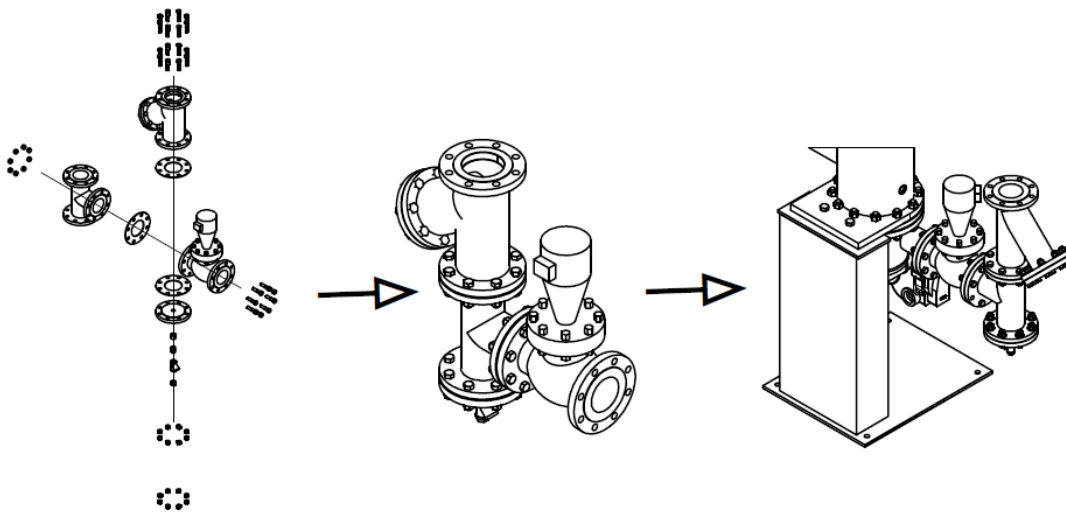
STEAM INLET PIPING ASSEMBLY INSTALLATION DIAGRAM
